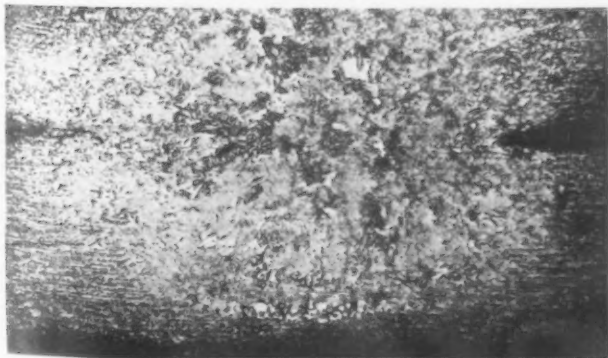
Section through spot weld of 10 gage low-carbon 12 to 14 per cent chromium material. (Monypenny, "Stainless Iron and Steel").
